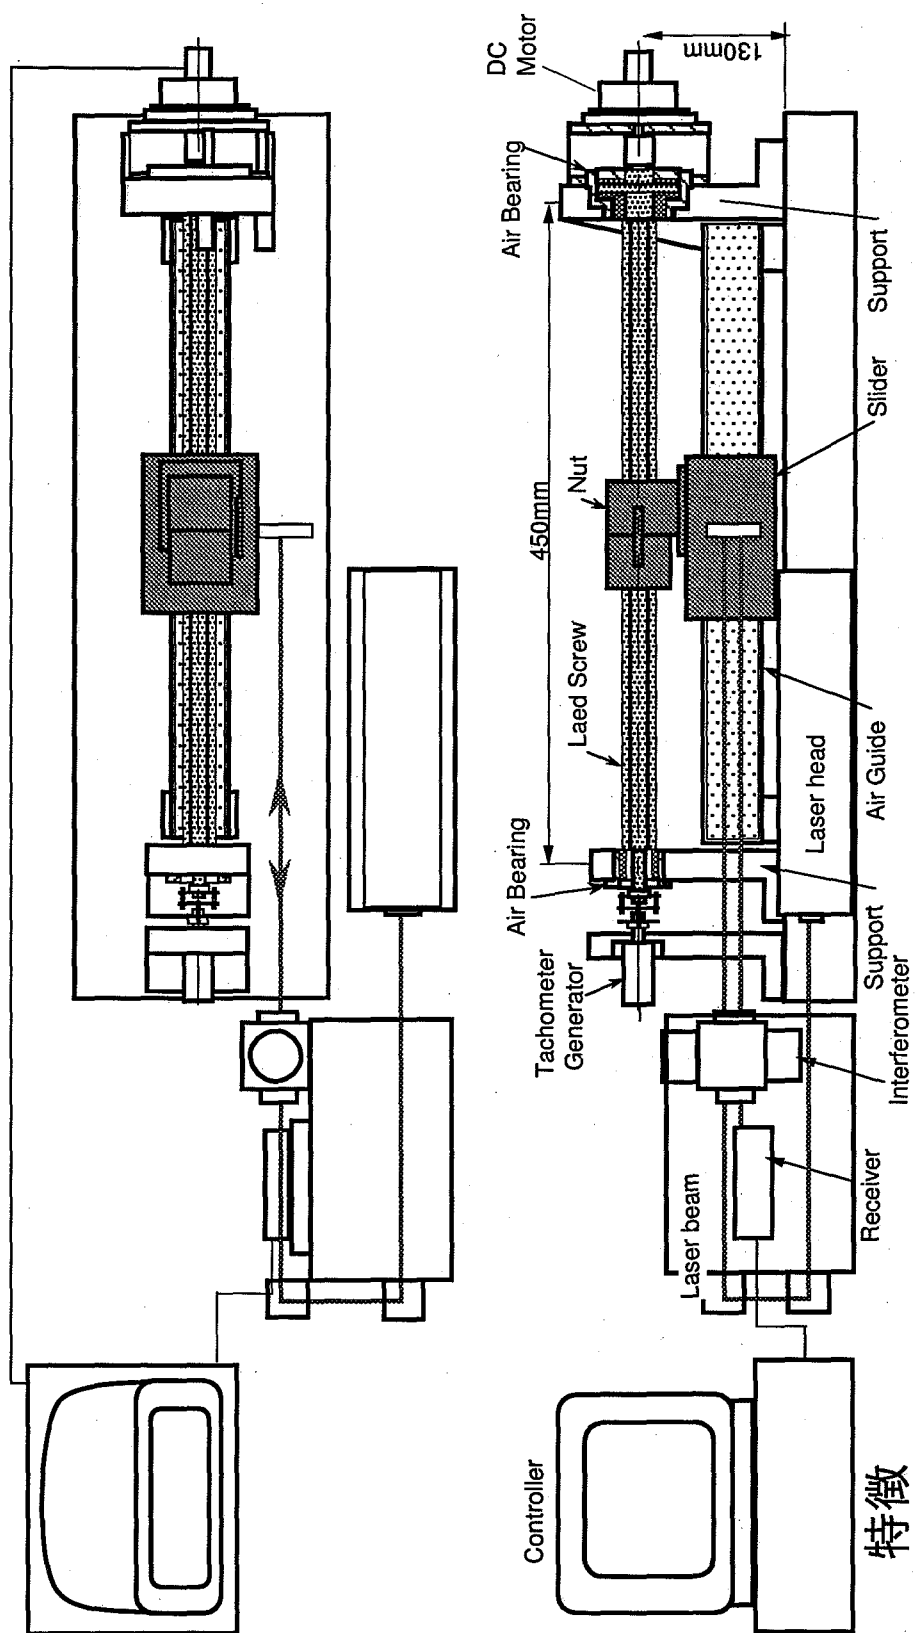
Air bearing positioning system using air bearing lead screw
